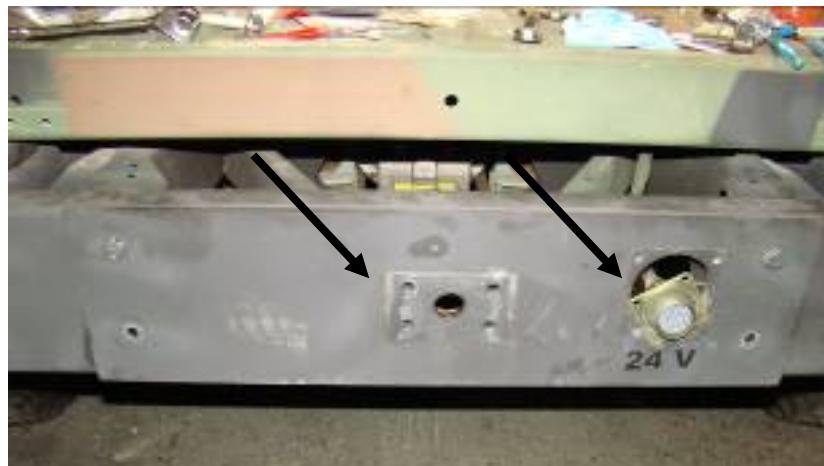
Pindle Bracket and Receptacle Cover Removed
